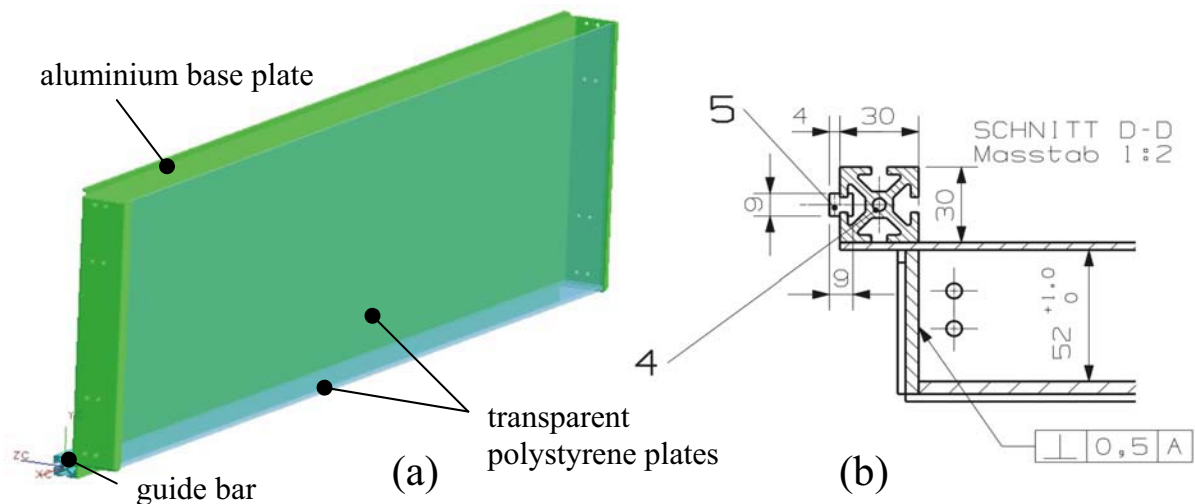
(a) 3D model of the box, and (b) cross-sectional view of the box from drawing DA01 (the view is rotated 90° clockwise). Position 4 is the guide bar; position 5 shows the gear rack.
